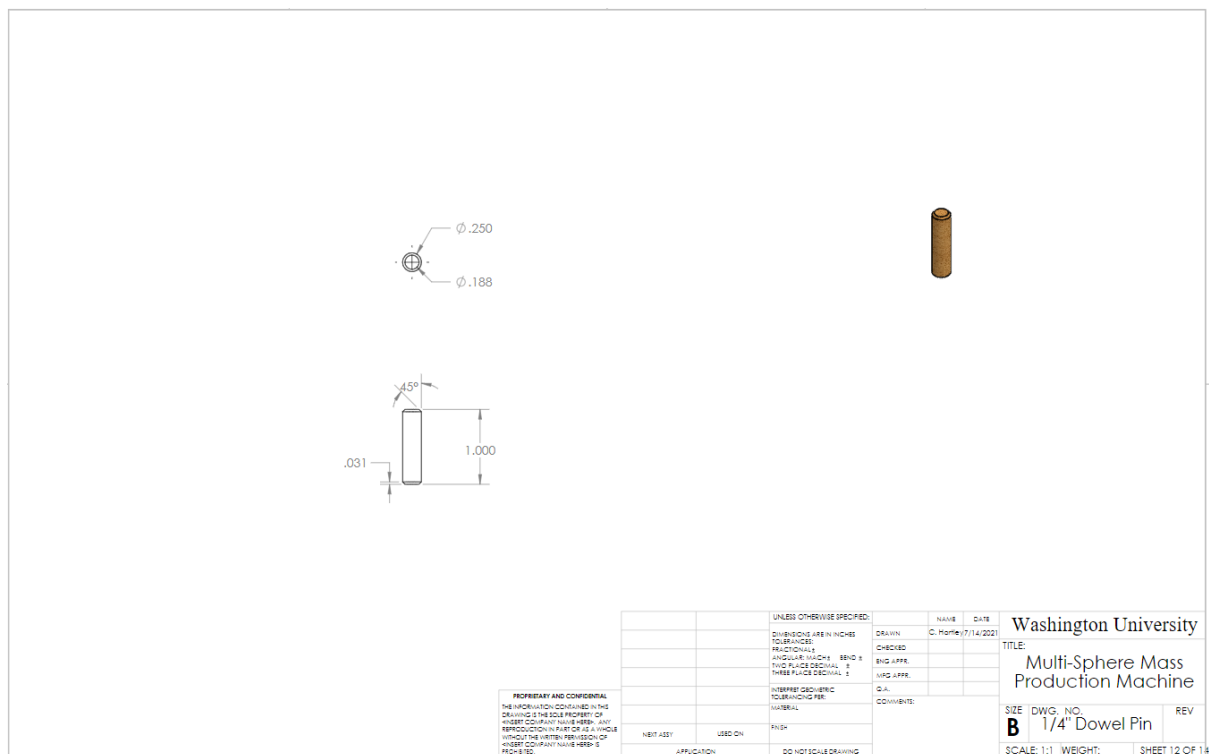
Proposed Final Design 1/4" Dowel Pin for Mold Alignment
